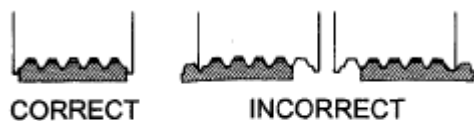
Checking Drive Belt Fits Properly In Ribbed Grooves
